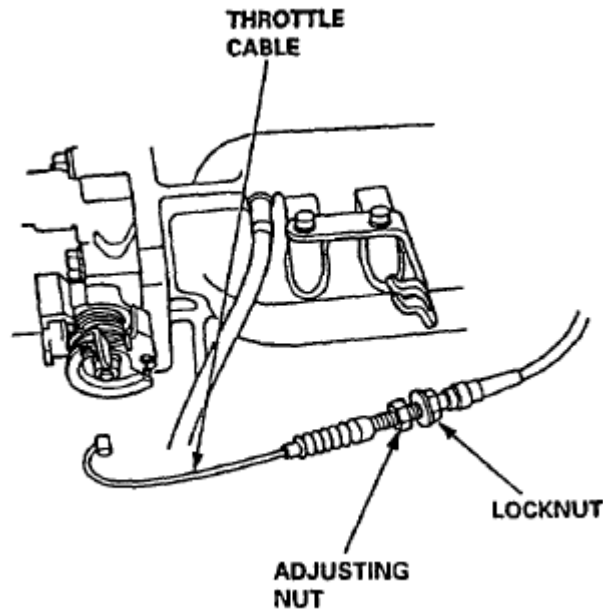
Identifying Throttle Cable, Locknut And Adjusting Nut
